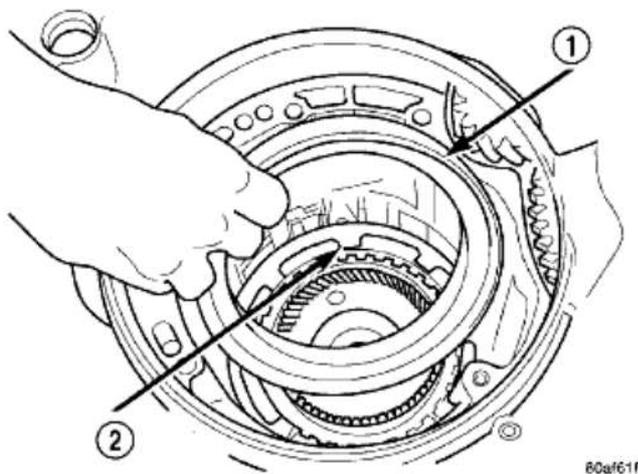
Removing/Installing 2/4 Clutch Retainer
